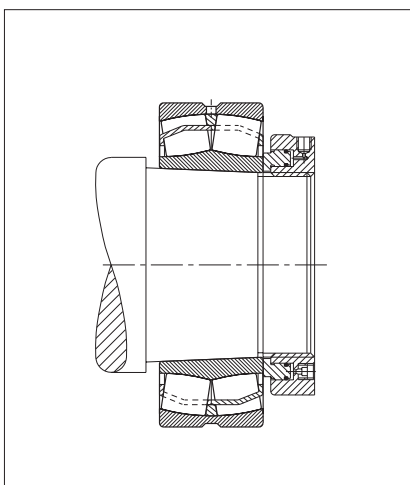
shows a spherical roller bearing driven directly up a tapered shaft seat. The bearing is first located on the tapered seat and the hydraulic nut is then screwed onto the threaded portion of the shaft until the bearing is firmly seated.
